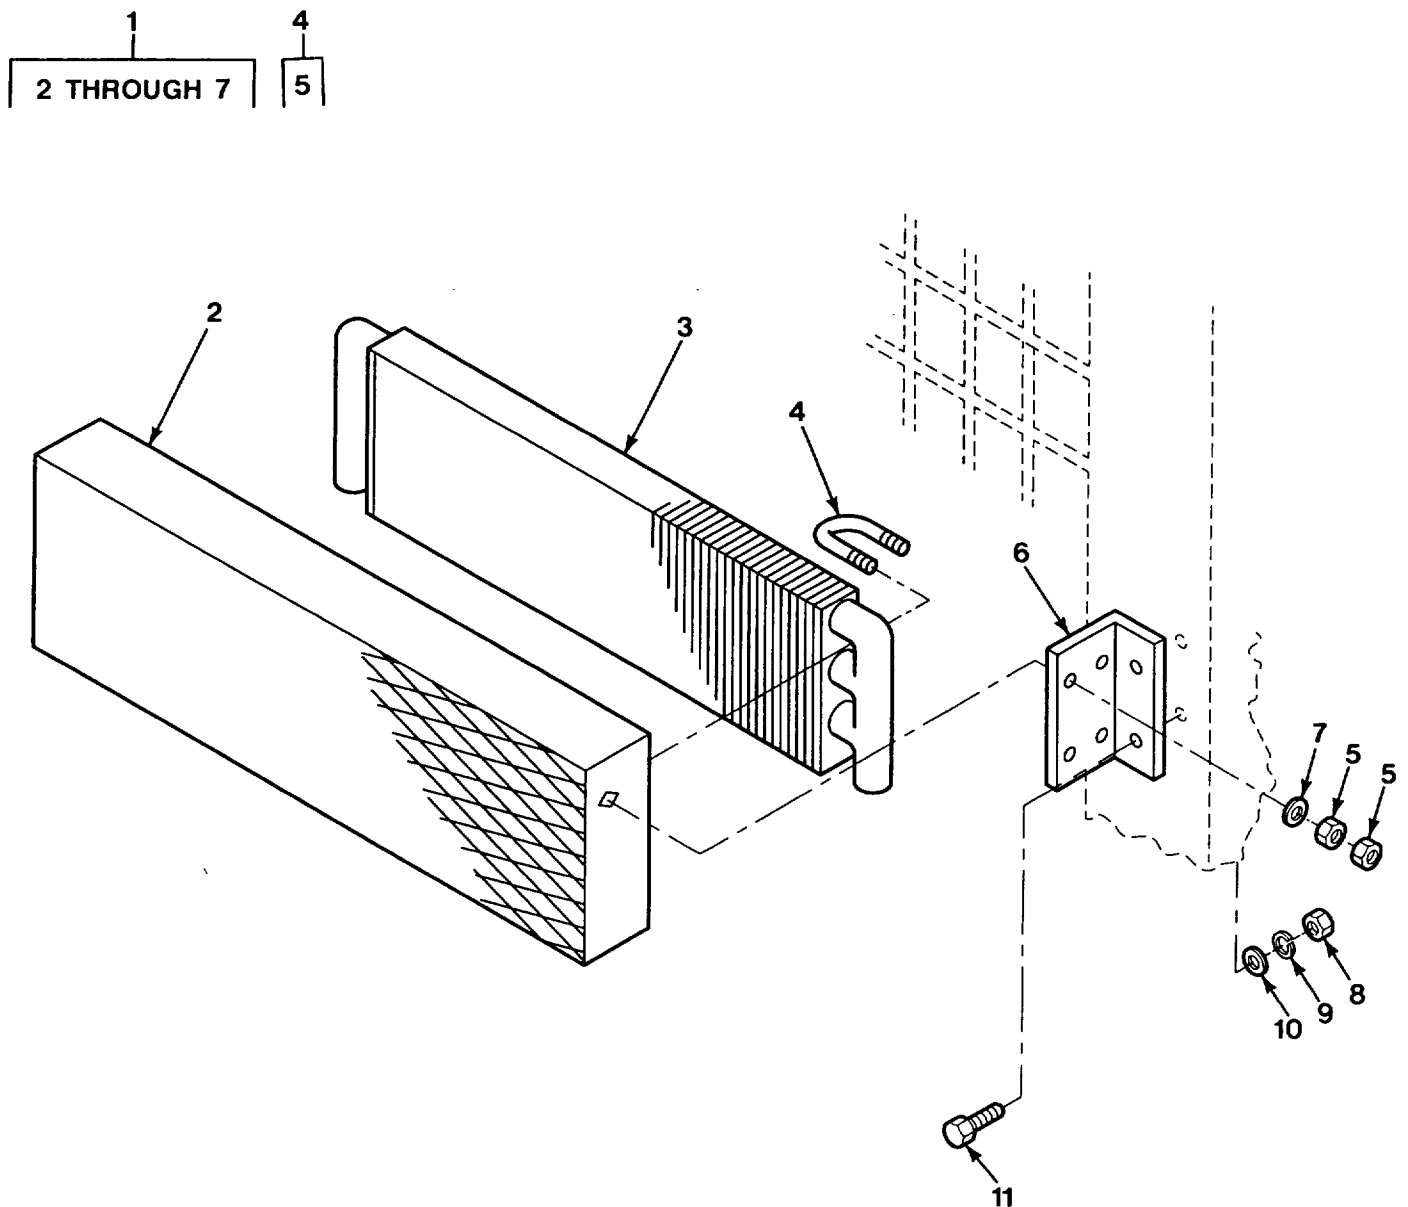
HYDRAULIC OIL COOLER ASSEMBLY
